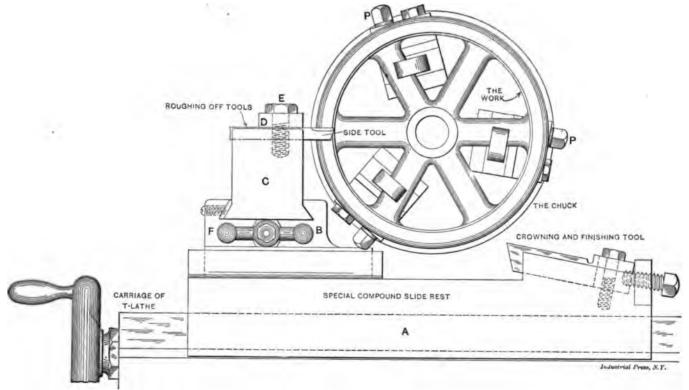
Manner of Holding Pulley in the Chuck and use of the Special Compound Slide Rest for Finishing the Face and Slides.
